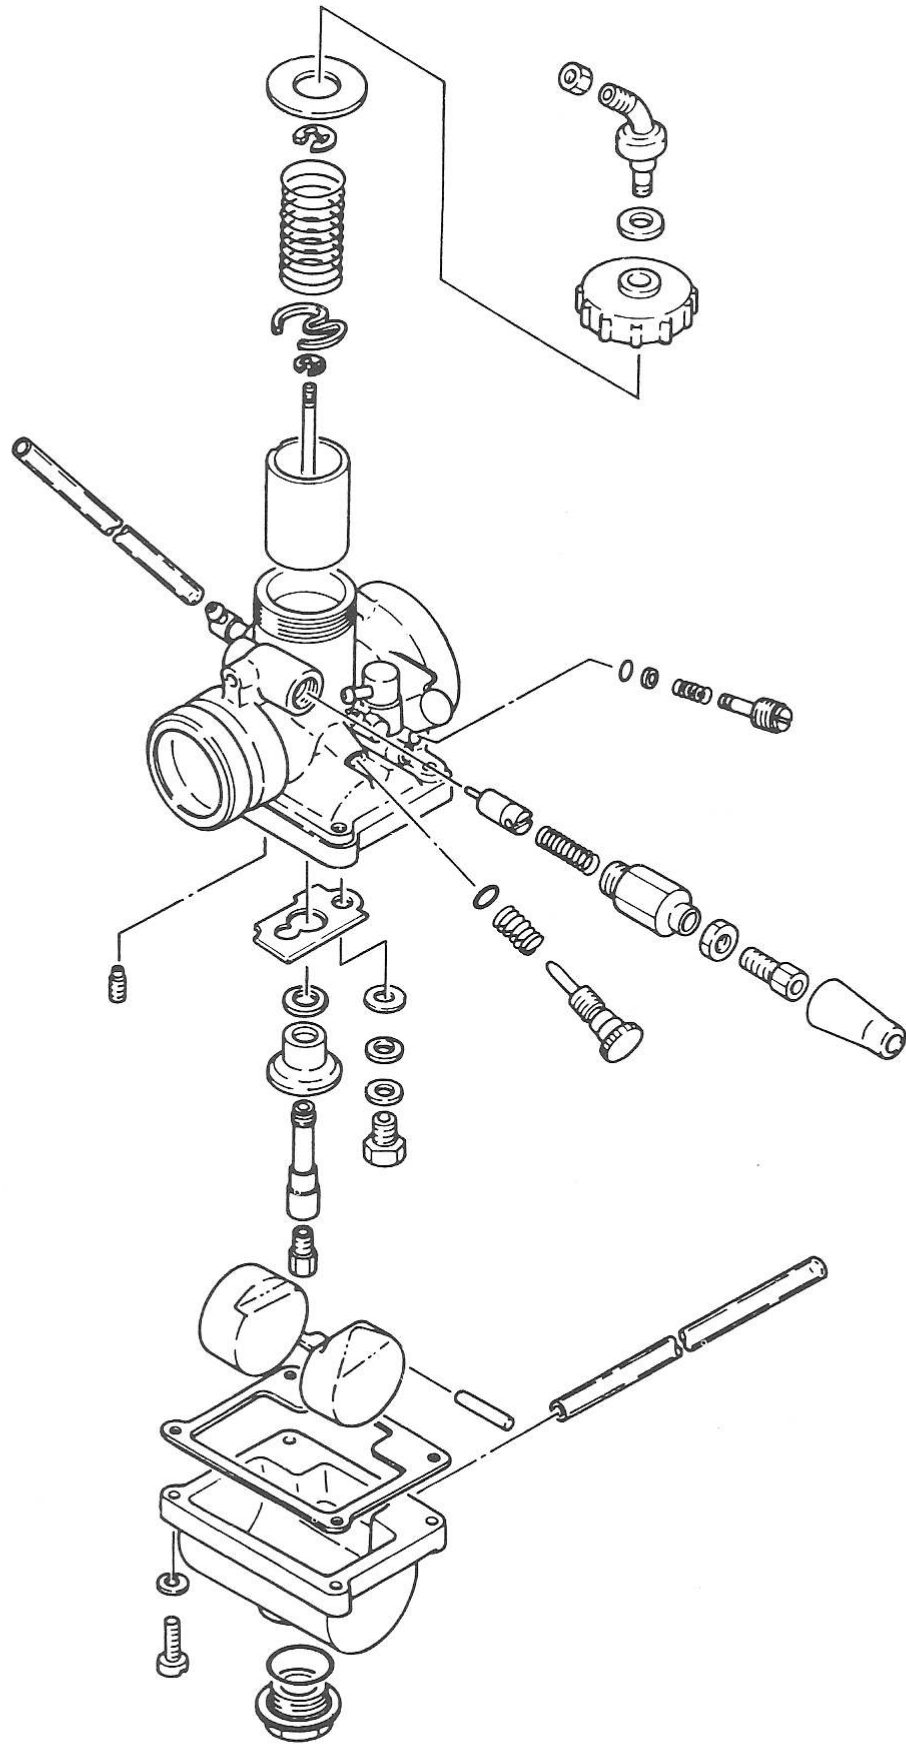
YT 125 carburetor components — exploded view (Sec 5)
